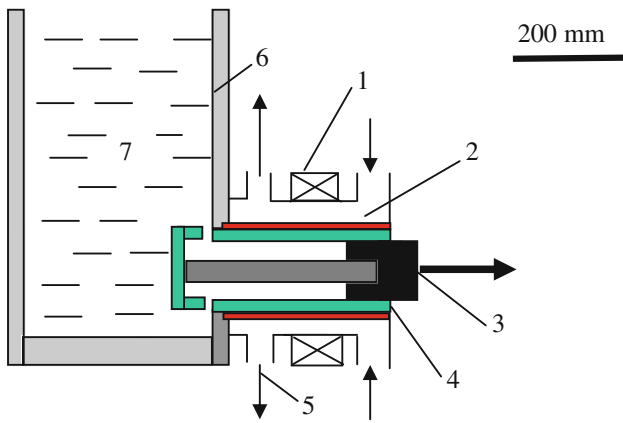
Schematic view of horizontal electromagnetic continuous casting apparatus: (1) RMF generator, (2) cooling system, (3) drawing system, (4) graphite mold, (5) cooling water, (6) furnace, and (7) molten metal
